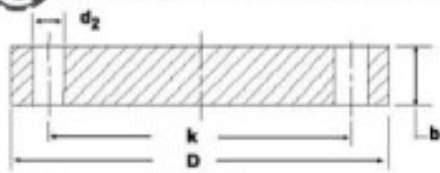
PLATE FLANGES FOR WELDING ■ IS : 6392 - 1971TABLE - 11(Clauses 4.1 and 5.1) Nominal pressure 1 N/mm²All dimensions in millimeters
